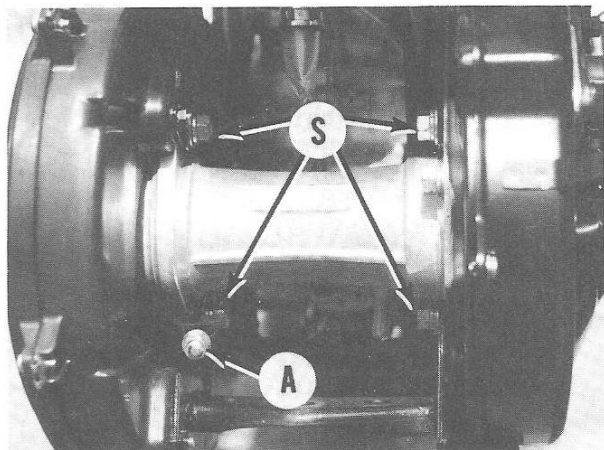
View showing location of rear housing retaining screws (S) and chain tension adjusting nut (A).
